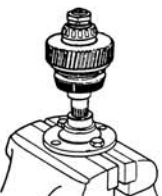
Use output shaft coupling as a holding fixture to aid in disassembly of output shaft.
